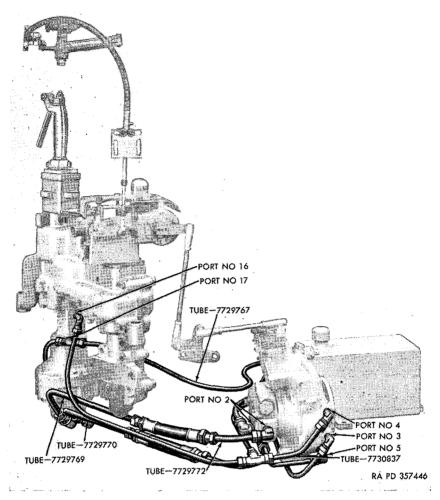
Rear view of hydraulic turret traversing mechanism tubing, hose, and fittings.
